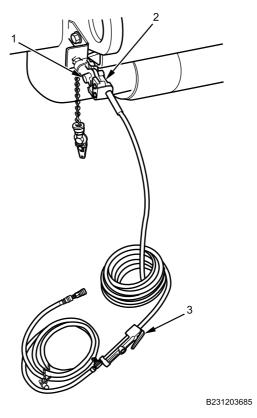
Assembled Inflator Hose Attached to Rear Supply Line.
